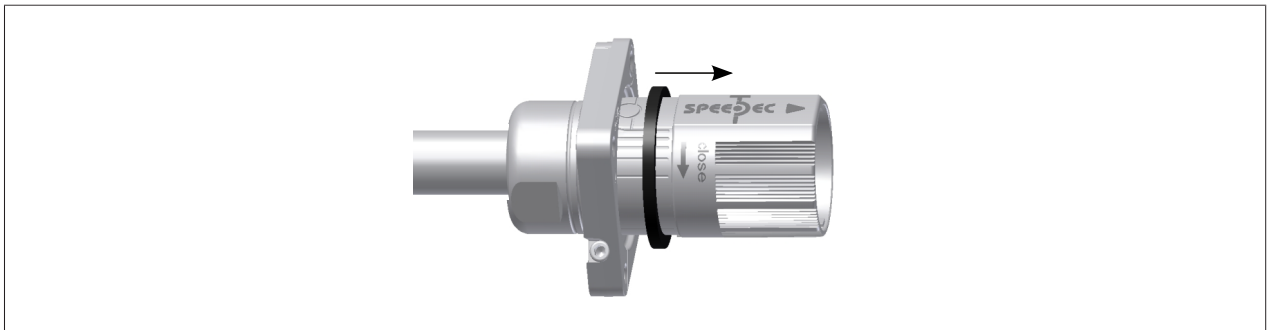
Attaching the metal flange to the connector (rear panel installation)
